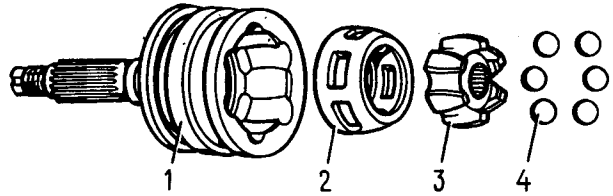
Front Wheel Drive Outer Joint Parts: 1 - joint housing; 2 - cage; 3 - holder; 4 - ball
